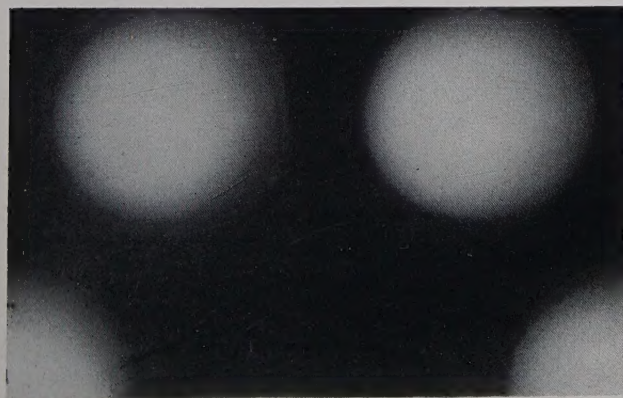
X-ray photograph of cracks in a boiler plate in and around the rivet holes (cf. *fig. 5a*).
